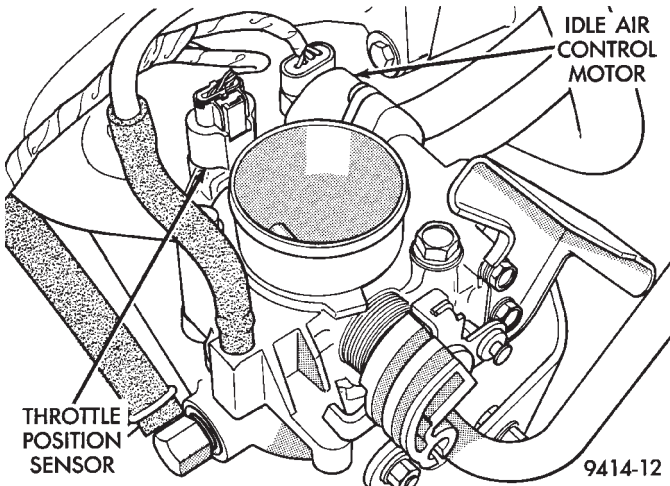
Idle Air Control (IAC) Motor and Throttle Position Sensor (TPS) Wiring Connectors and Vacuum Hose Connection.
